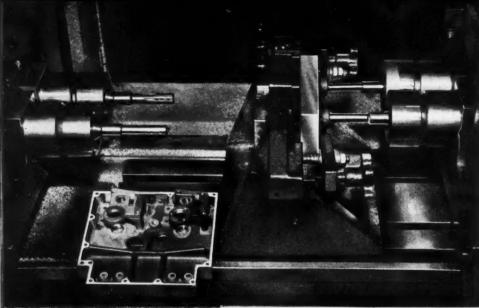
Boring Holes in Back Cover Assembly. The Tolerance on the Diameter of Each Hole is 0.0004 Inch, and on the Alignment of the Center Lines, 0.0005 Inch
